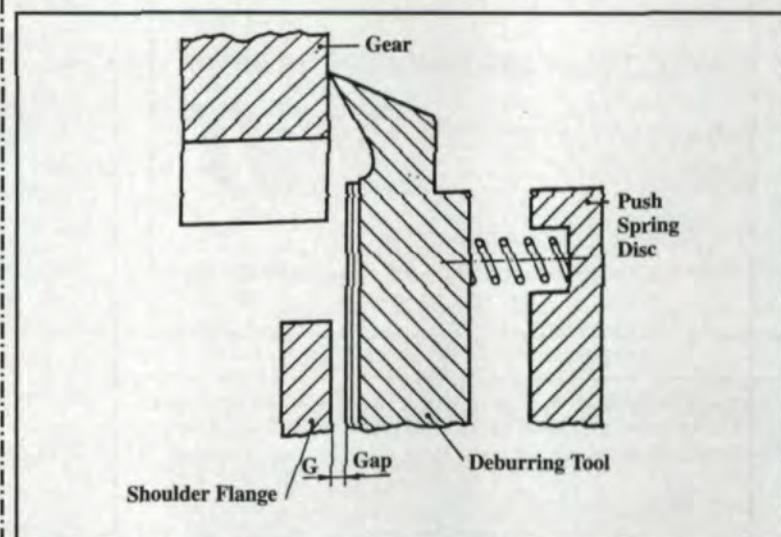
Cross sectional view of deburring tool with spacers and springs.
